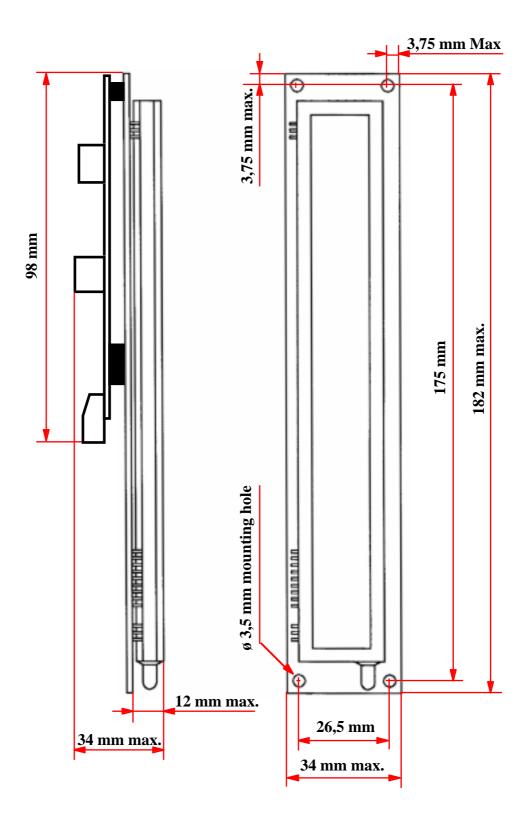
QTP 03-C24, F24 DIMENSIONS
